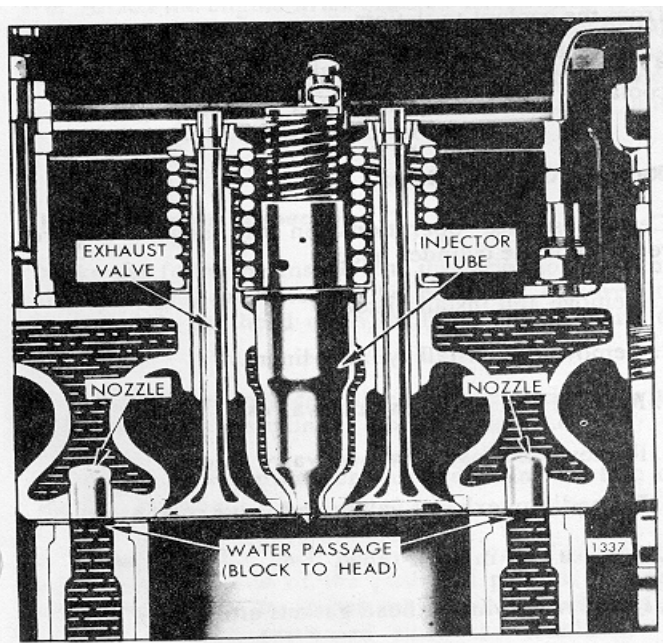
Coolant Passages Around Exhaust Valves and Fuel Injectors
